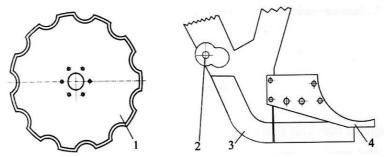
Complex sowing coulter parts: 1 – disc knife with notched blades; 2 – mounting place of the disc knife; 3 – hob coulter with extended hob; 4 – mount of sowing apparatus
